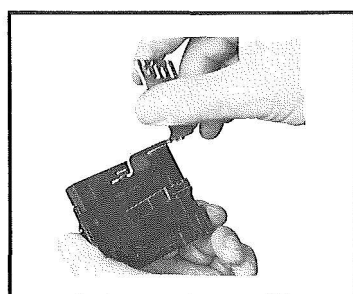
Installation of mounting bracket used on CR305, 306, & 360L.
